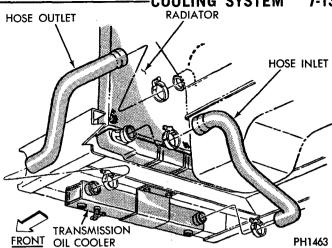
Radiator Oil Cooler Hoses A-345 and Allison AT 540 Transmission (Typical)
